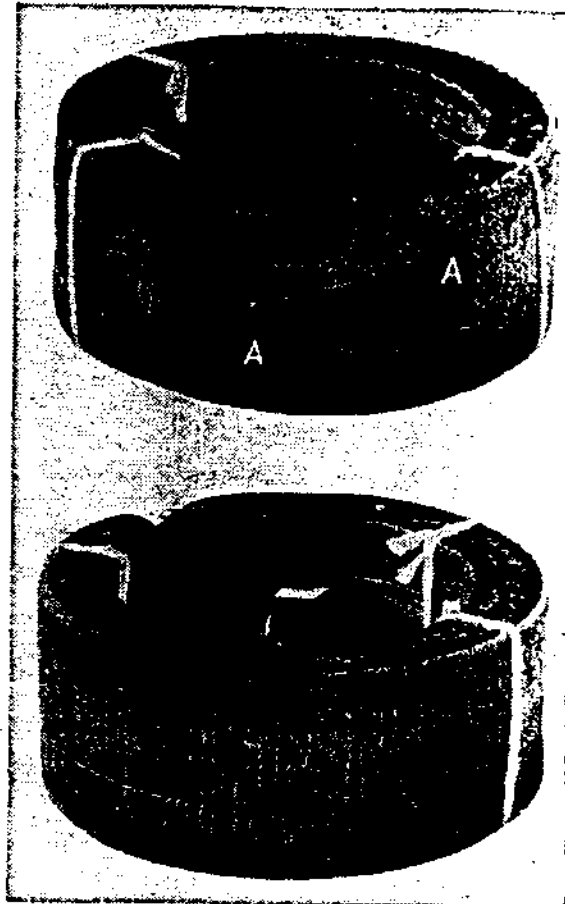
Packing removed from service showing damage from excessive swelling.
